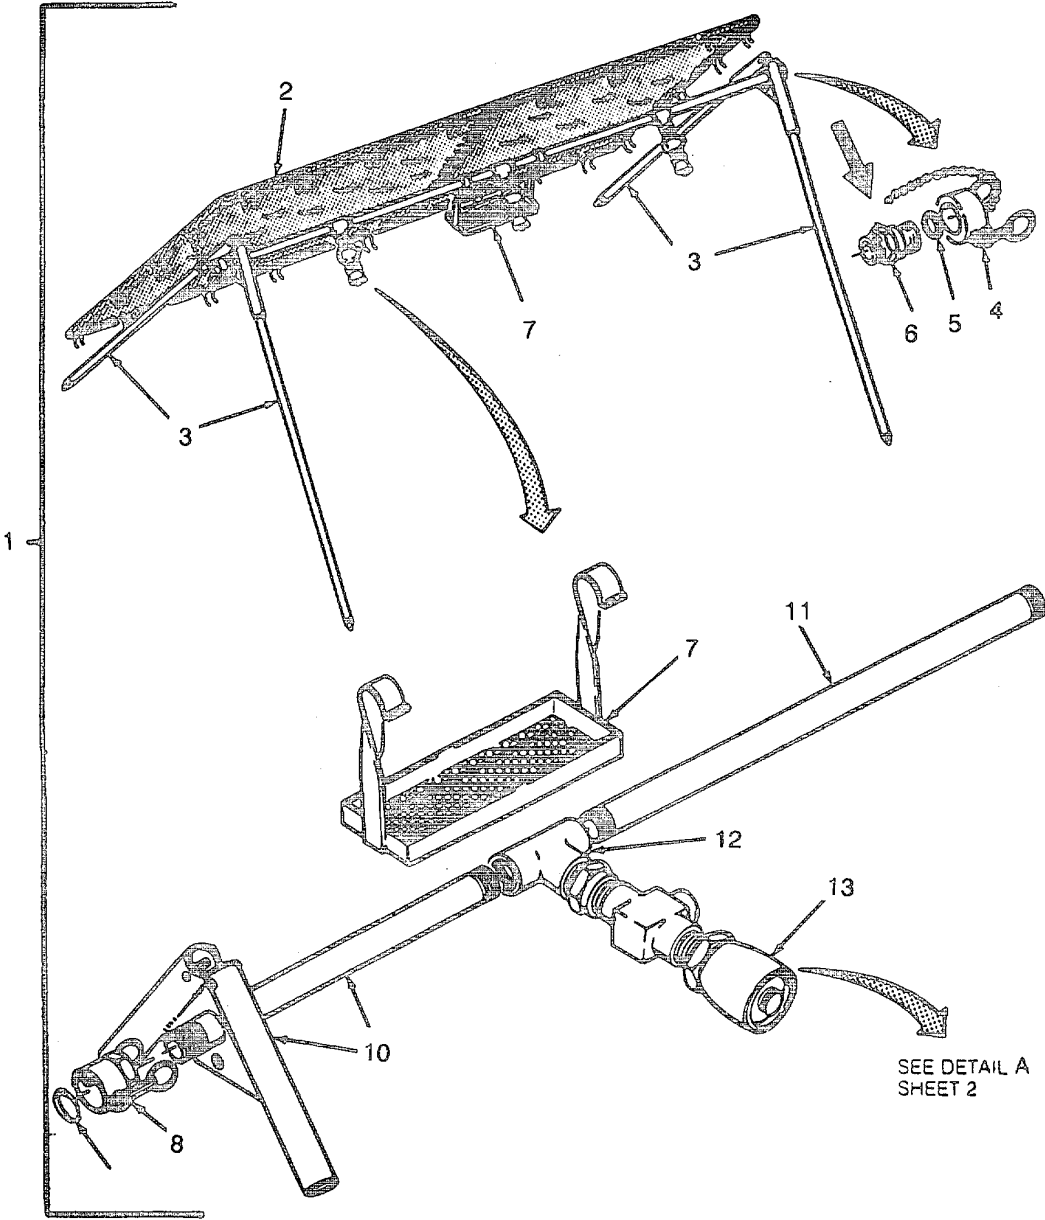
Shower Stand Assembly (Sheet 1 of 2).
